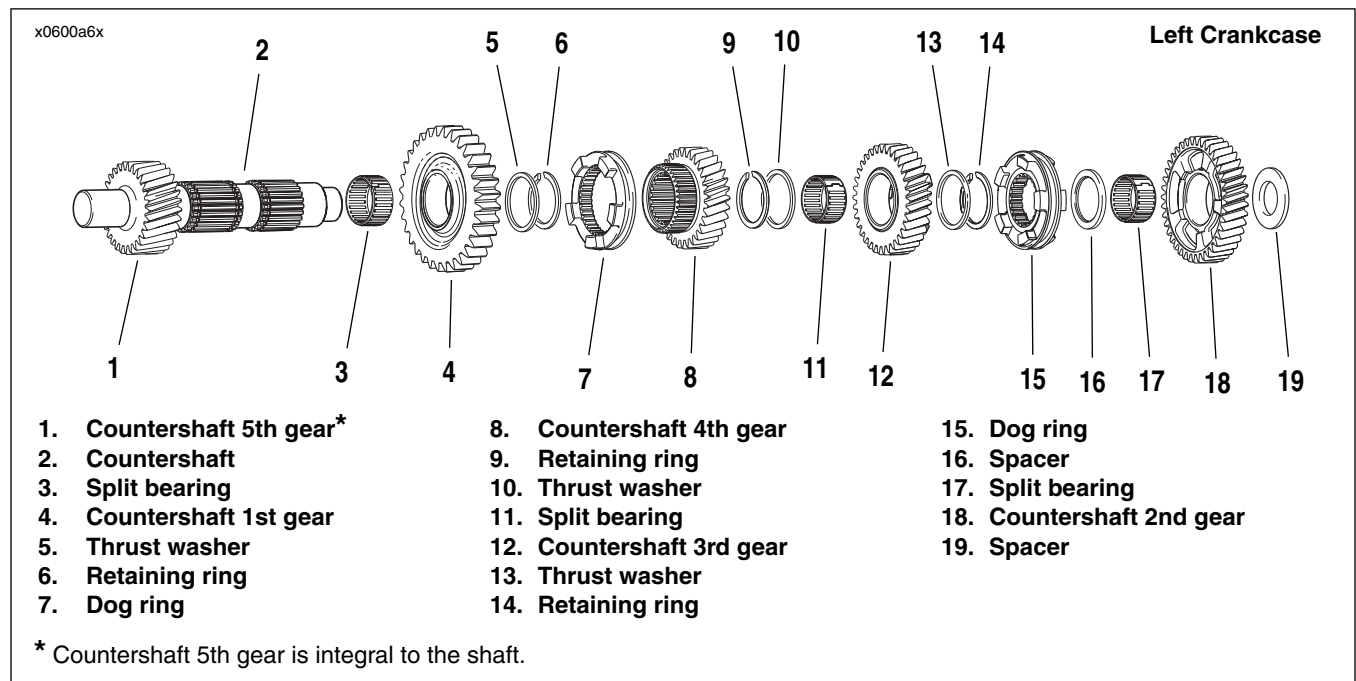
Transmission Countershaft Assembly Once Removed from Left Crankcase/Disassembly
